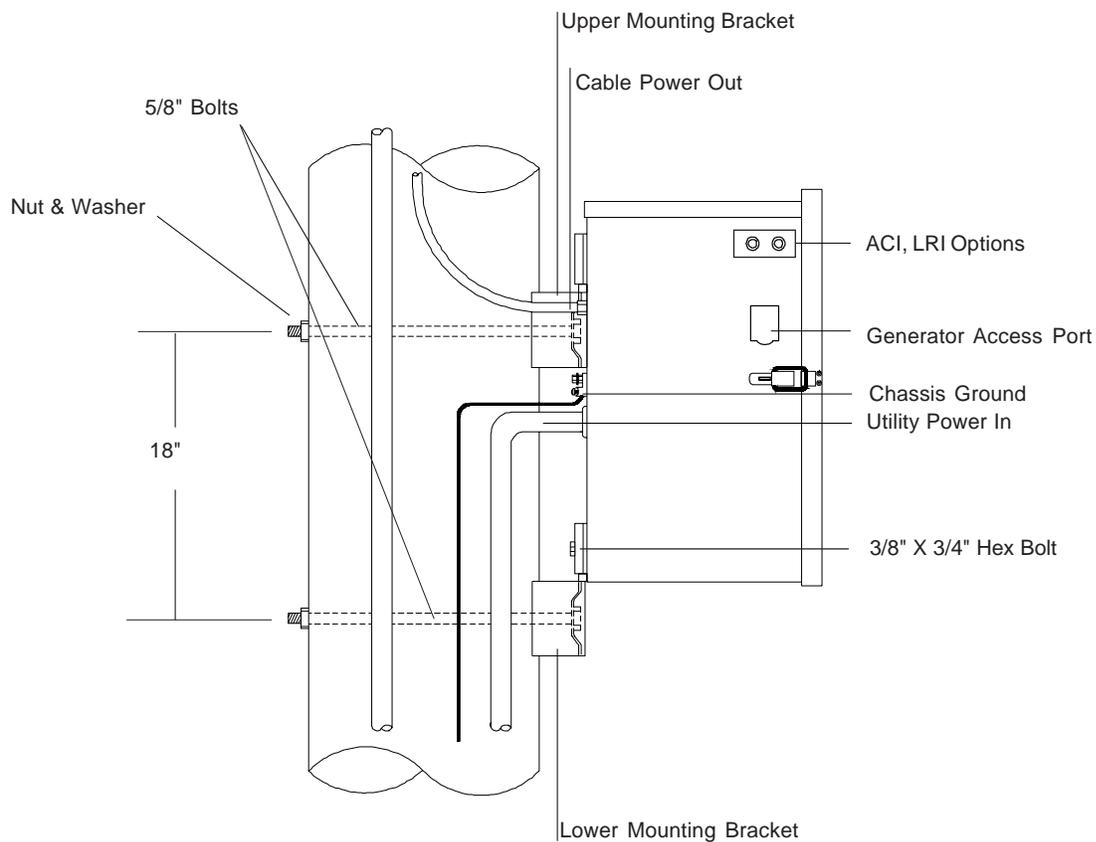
, PWE Series Pole-mount Enclosures (Wooden Poles)
